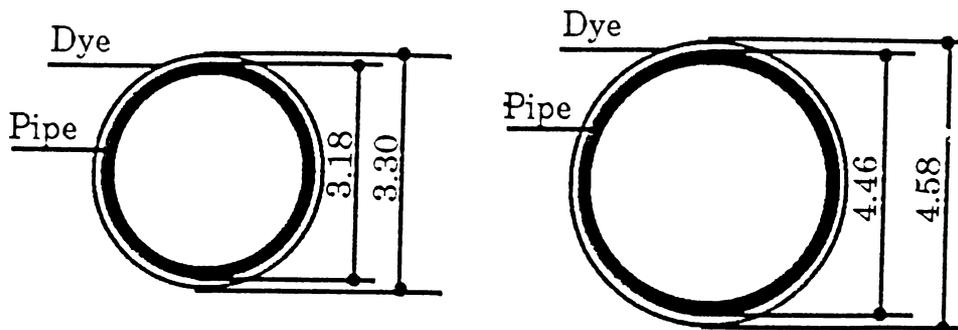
Section of a Rubber Base Painted Pipes Used as Handrail's Material.
